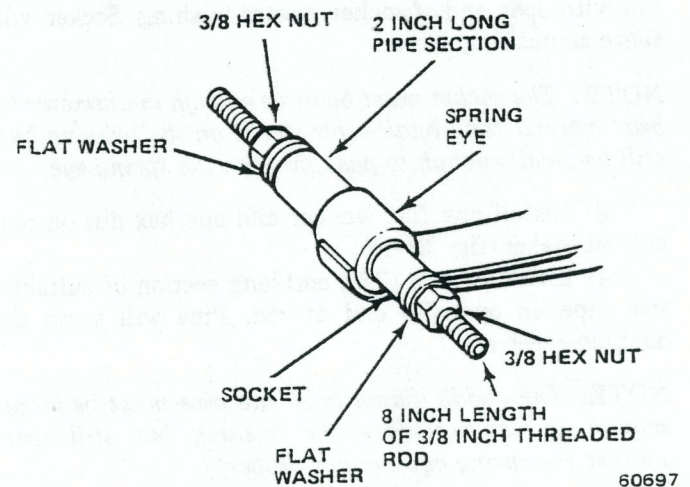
N-9 Bushing Replacement Tools—Small Bushing
